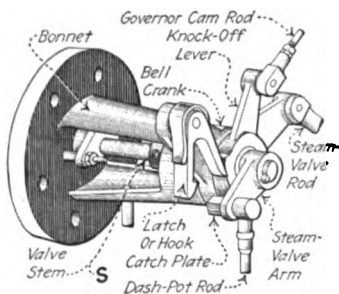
Part-side view of typical Corliss-valve releasing mechanism.
